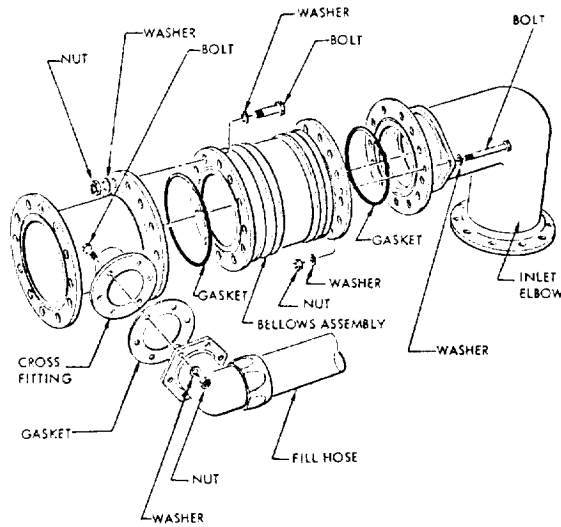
Typical flange joints of a propellant duct assembly.
